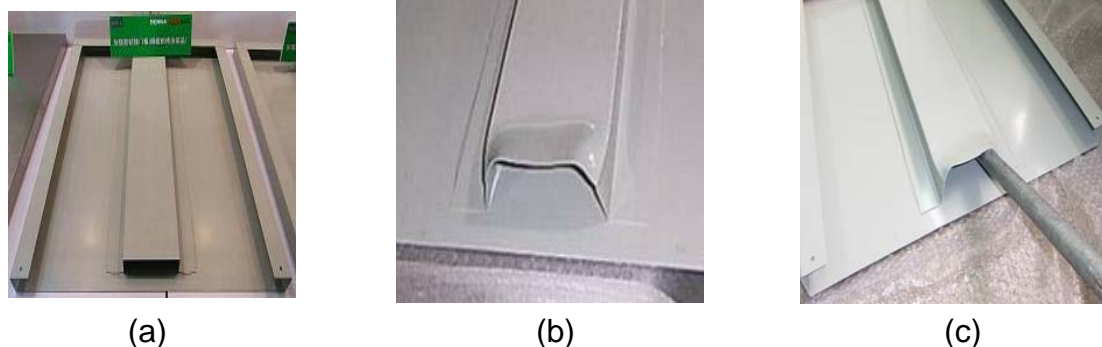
(a) A example of reinforcement bonding in elevator wall panels(Made of steel plate.Baking finish)(b) After destruction test. (c) Method of destruction test.
